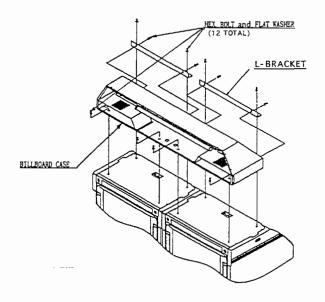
BILLBOARD INSTALLATION DETAILS
